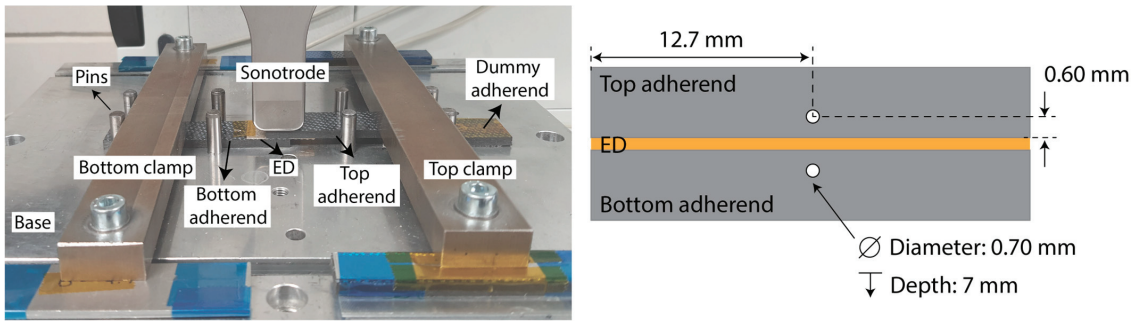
(Left): welding setup. (Right): schematic indicating thermocouple positioning.
